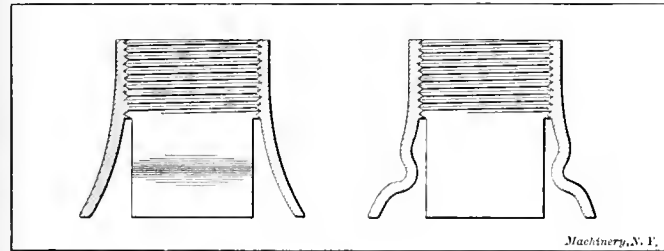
Special Sleeve for Gripping the End of the Broken Rod
